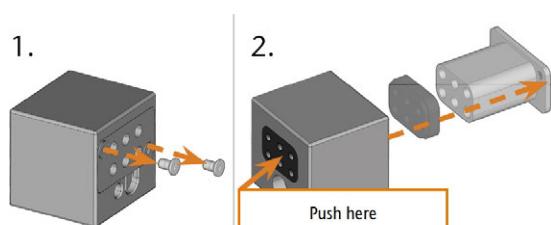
REMOVING AN INSERT FROM A TOOL MAGAZINE
